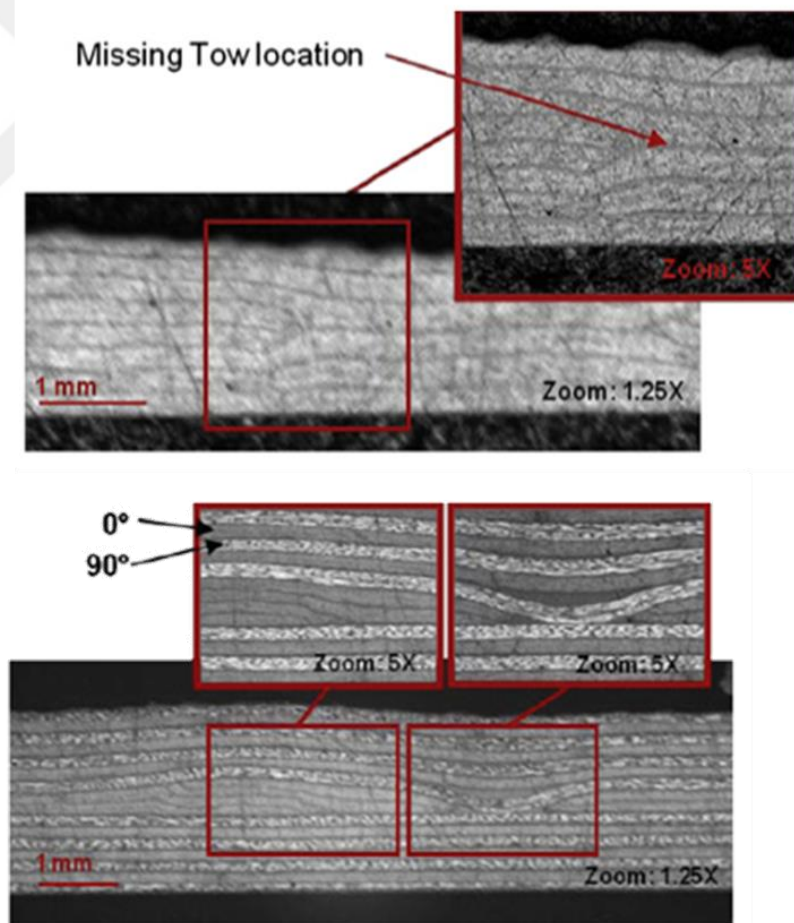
Tension specimen with gap (left), IPSS specimen with gap and overlap (right).
